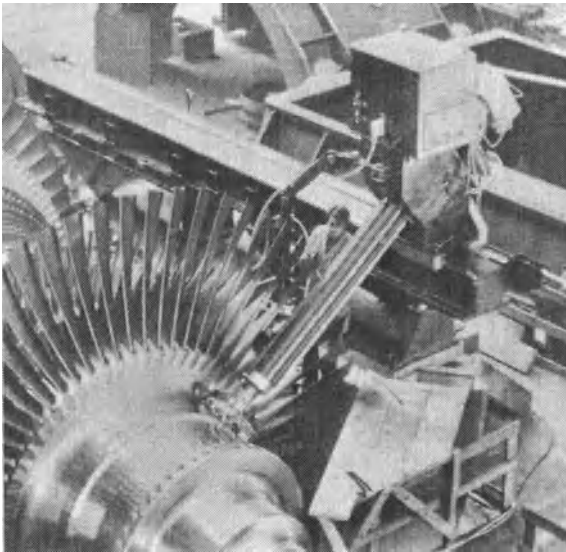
In-service test of the low-pressure shaft of a 1300-MW turbine. The shaft need not be removed from the casing. (Courtesy BBC, Baden, Switzerland; product of Krautkrämer-Geysssel)
